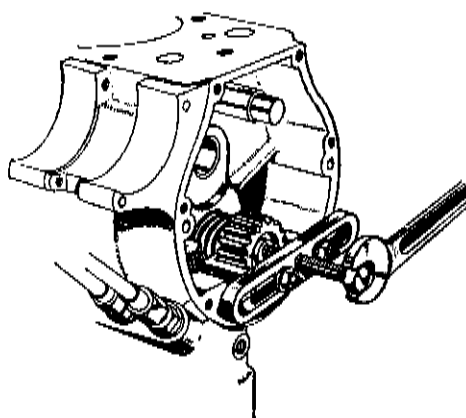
Engine shaft pinion extractor (Service Tool 61-1735)
